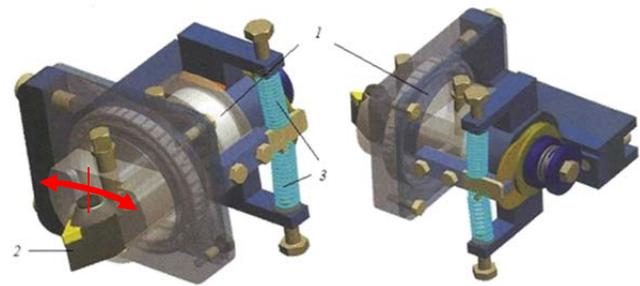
The virtual 3D CAD model of fixture with movable turning tool – design 1 (1 – roller bearings, 2 – turning tool, 3 – springs)
